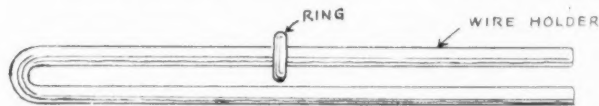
By bending a stiff wire in a long U shape, another ring-holder may be made.
